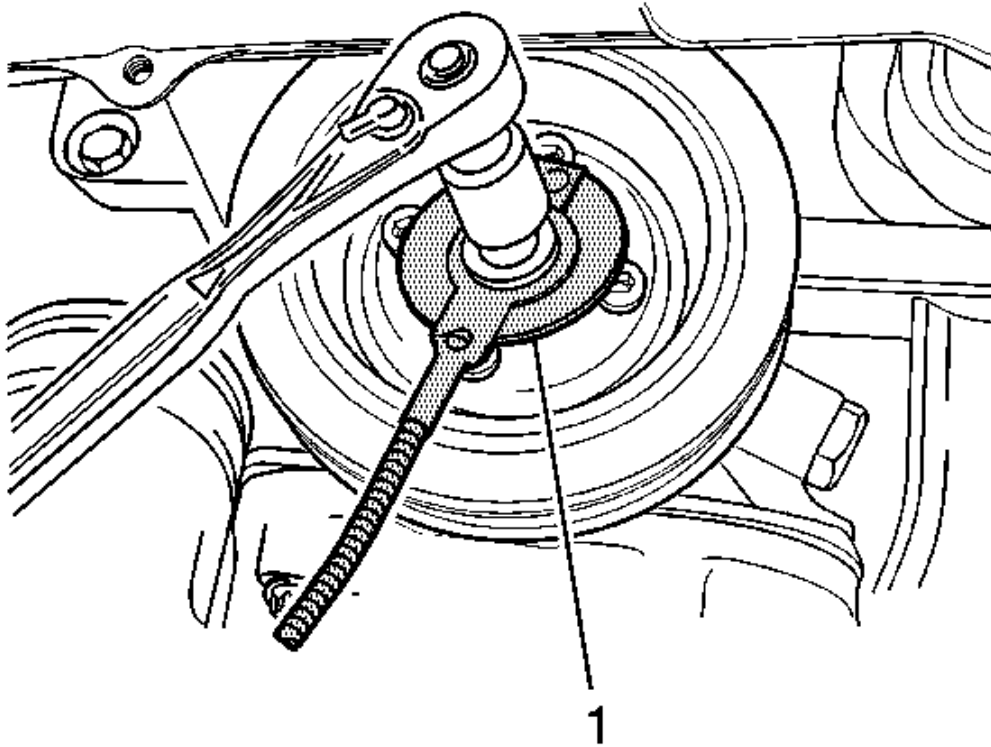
View Of Crankshaft Gear Bolt Tightening Procedure
